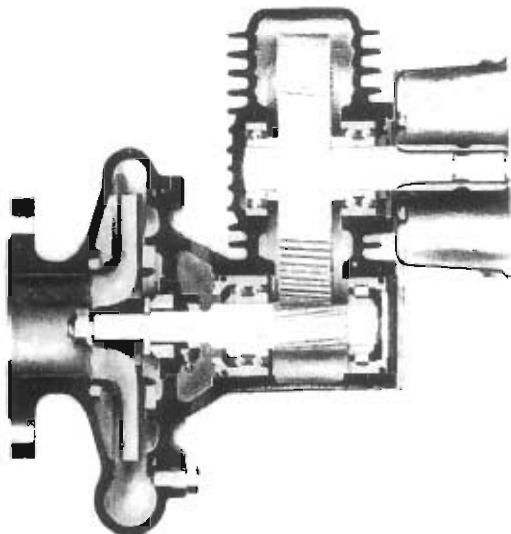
Typical tractor driven centrifugal pump with built-in gears
